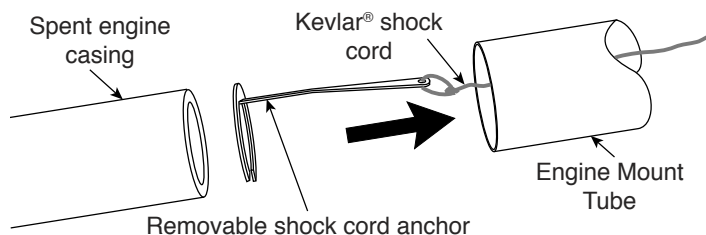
The shock cord anchor is inserted into the engine mount using a spent engine casing.
